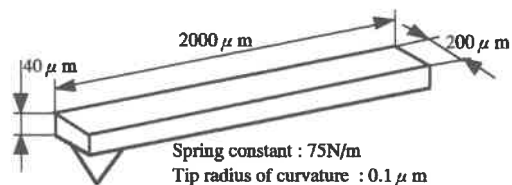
Dimensions of AFM Cantilever and mechanical condition
